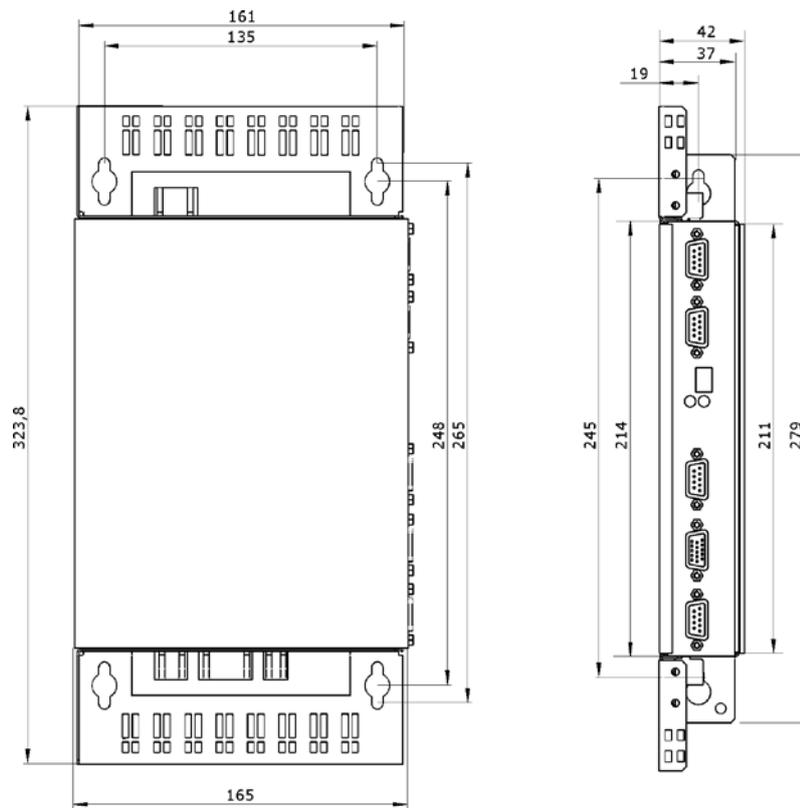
Dimensions of ECOVARIO® 114 [mm], upper shield optional
